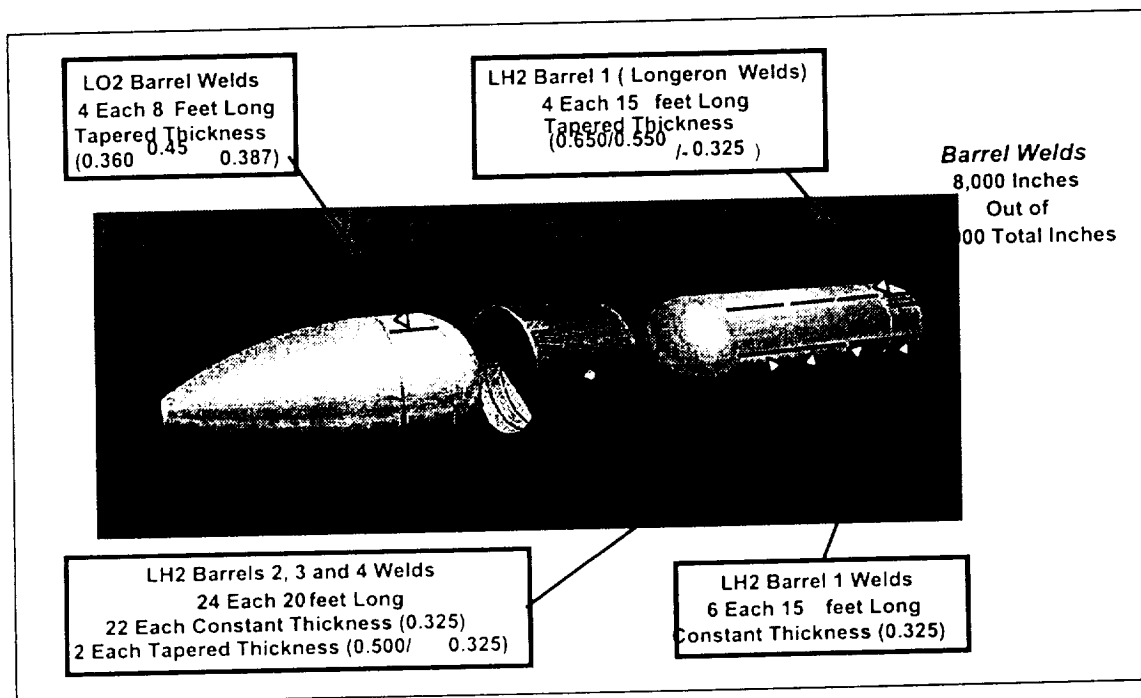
External Tank Component Breakout with Planned Friction Stir Welding for Barrel Application.
